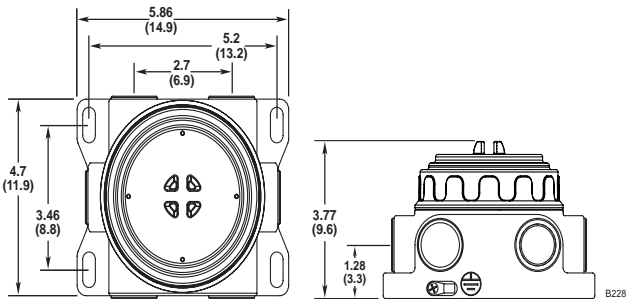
Junction Box Dimensions in Inches (Centimeters)
